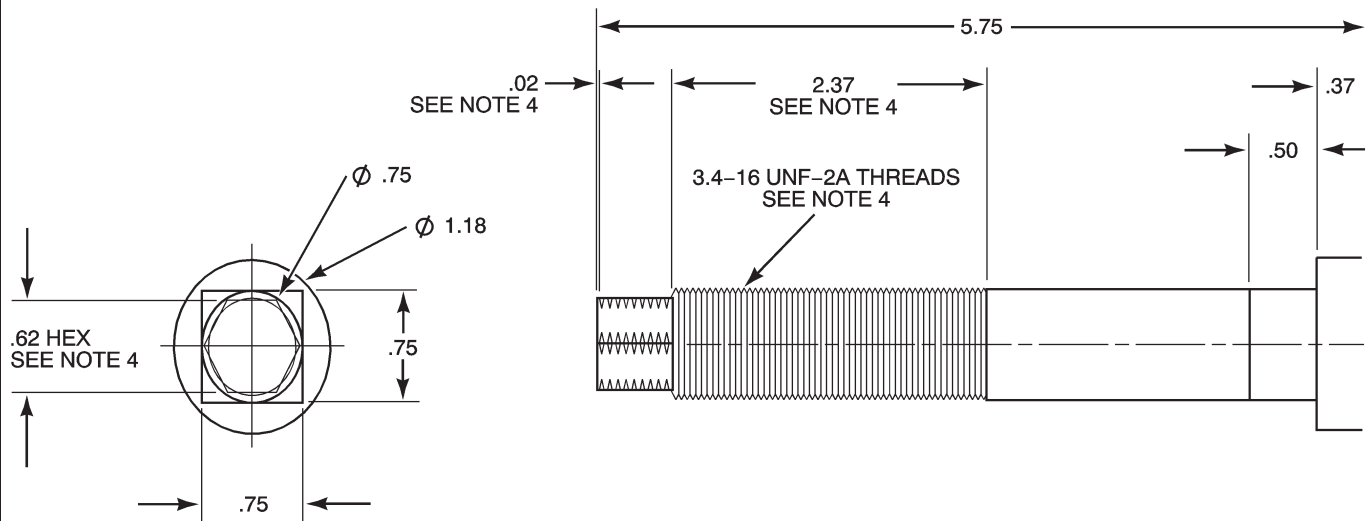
Bearing Installation Kit - Stabilator Pivot, 5710 (Sheet 4 of 4)
